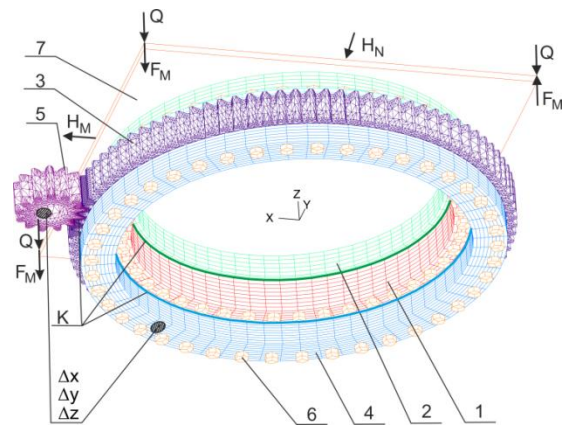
A visualisation of finite elements of single-row ball slewing bearing, coupled with a drive pinion
